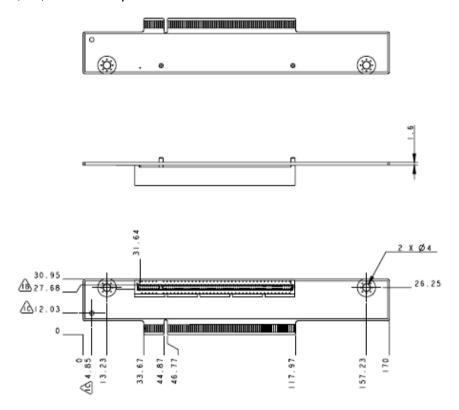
1U PCI Express\* Riser Card Mechanical Drawing
